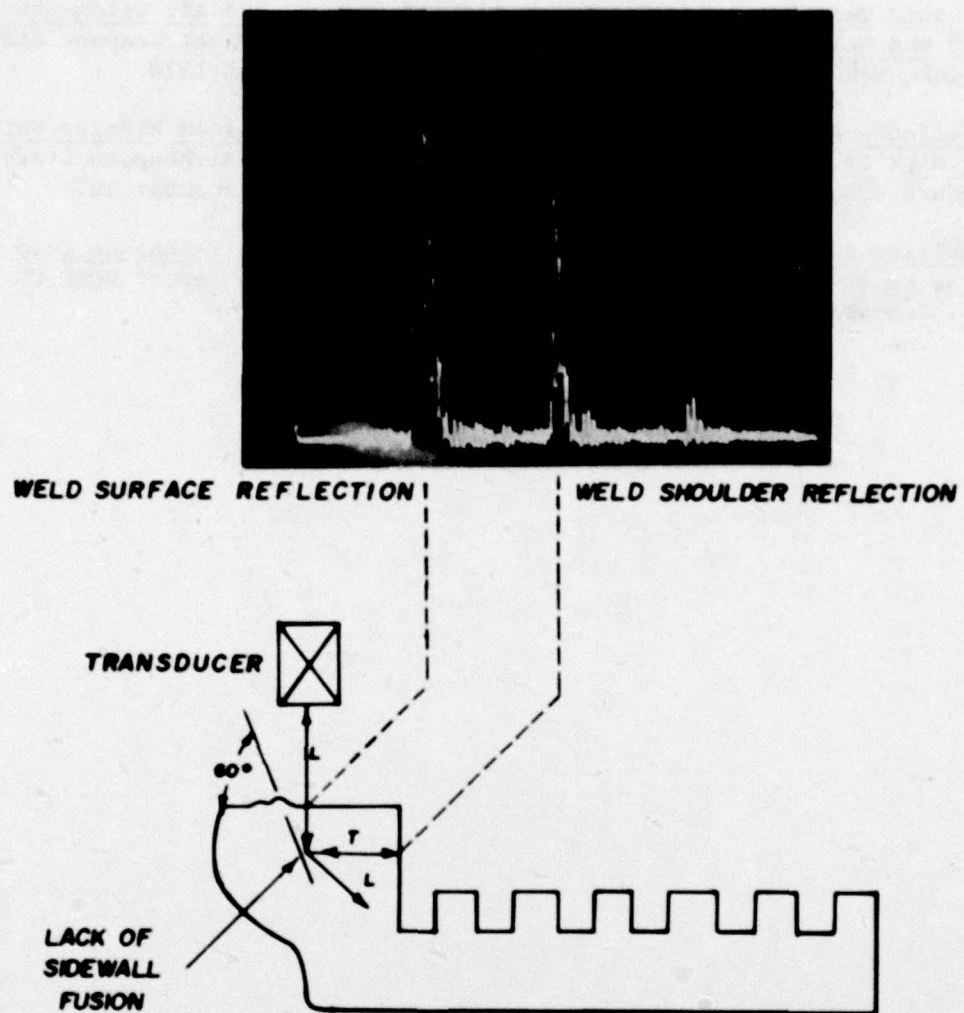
Forward Weld Aft Sidewall Inspection
